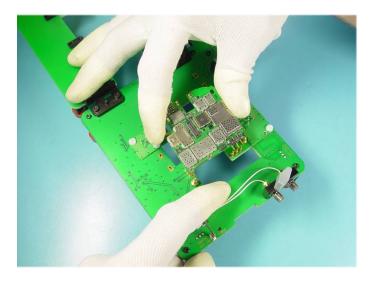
RF connector tool SS-231, engine module and module jig MJ-277
